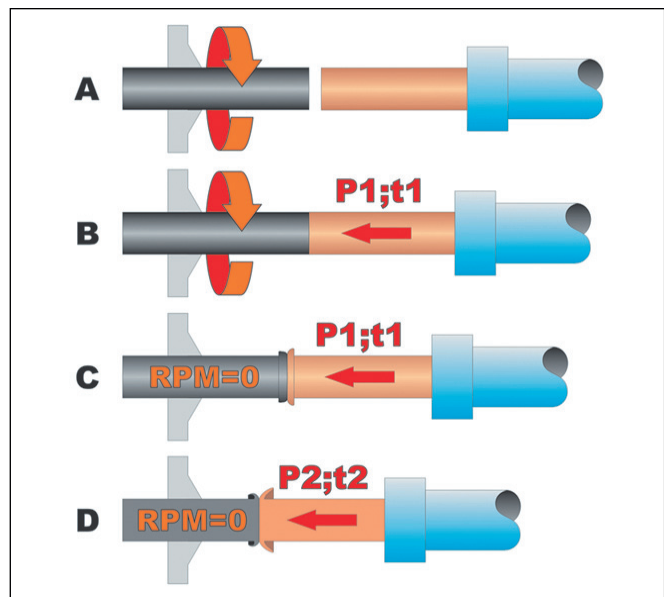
Phases of conventional friction welding process. A: period of approximation; B:  $P_1$ ,  $t_1$  application; C: end of  $P_1$ ,  $t_1$ , and breaking of the machine (RPM=0); D:  $P_2$ ,  $t_2$  application and finish welding (Alves, 2010a).
